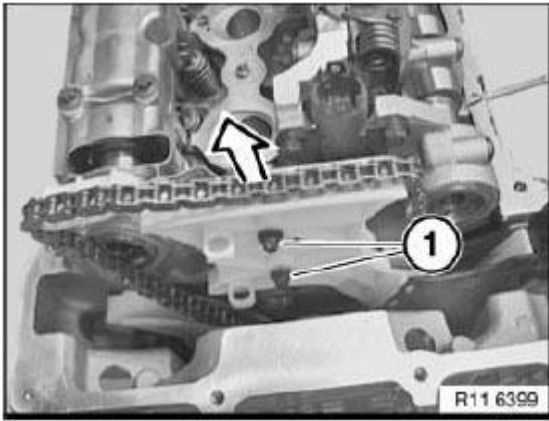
Removing Timing Chain Module With Timing Chain And Sprocket Wheel
